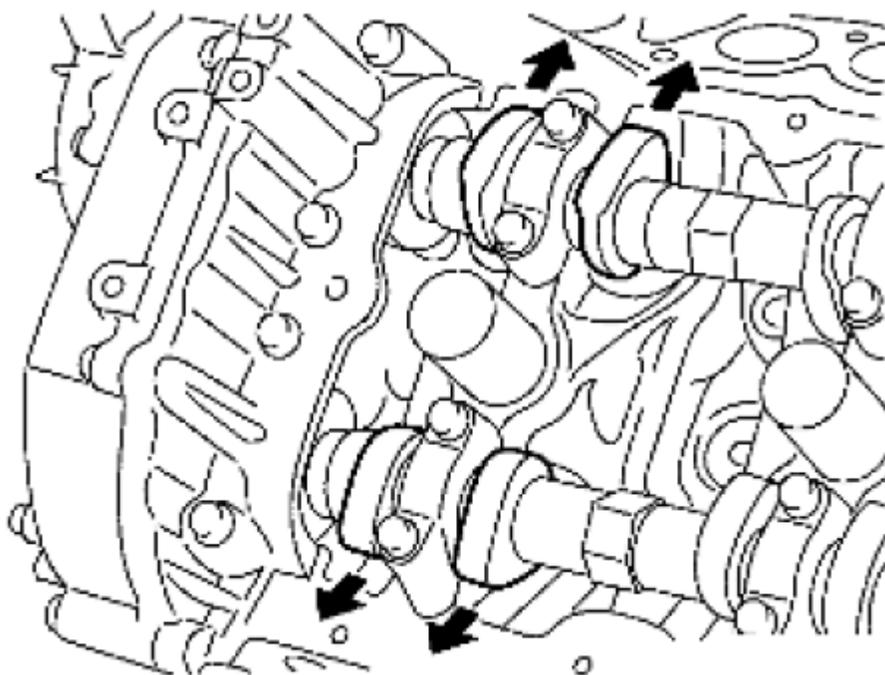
Locating Intake And Exhaust Cam Noses Of No. 1 Cylinder
